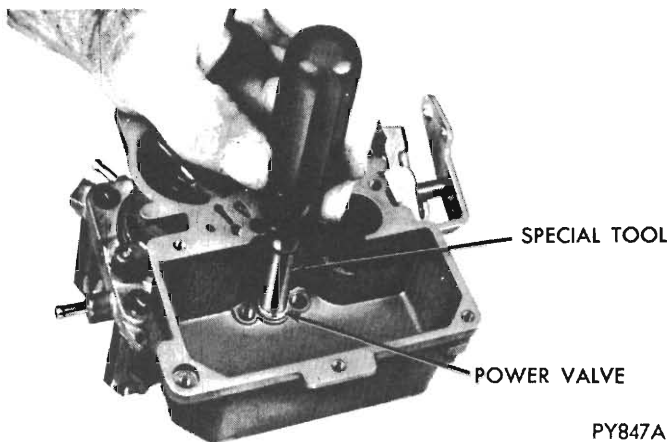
Removing or installing power valve (using Tool No. E14C30G)
